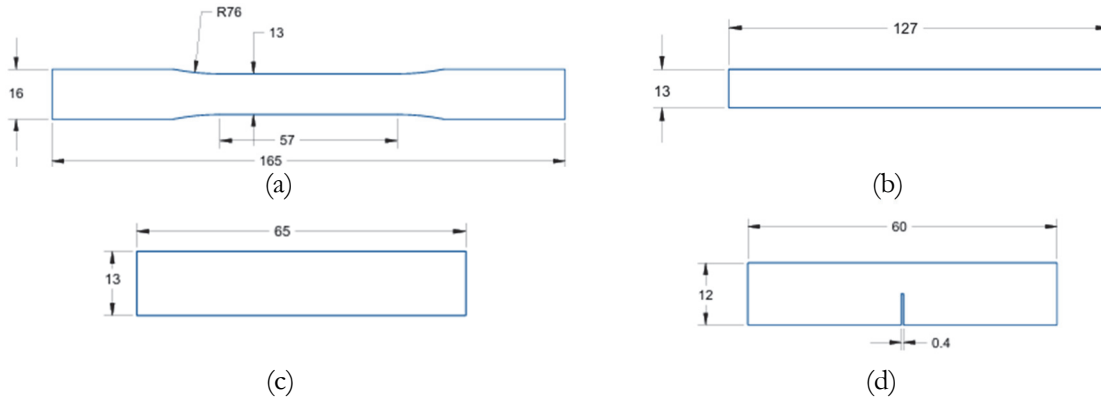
Dimensions of specimens for (a) Tensile (b) Flexural (c) Impact (d) Fracture tests
